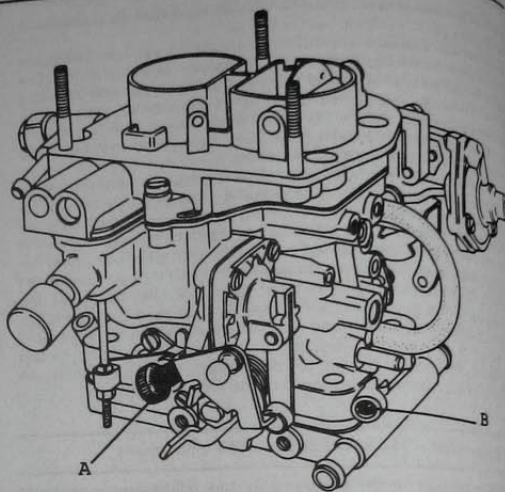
Weber carburettor idle speed screw (A) and mixture adjustment screw (B) (Sec 14)
